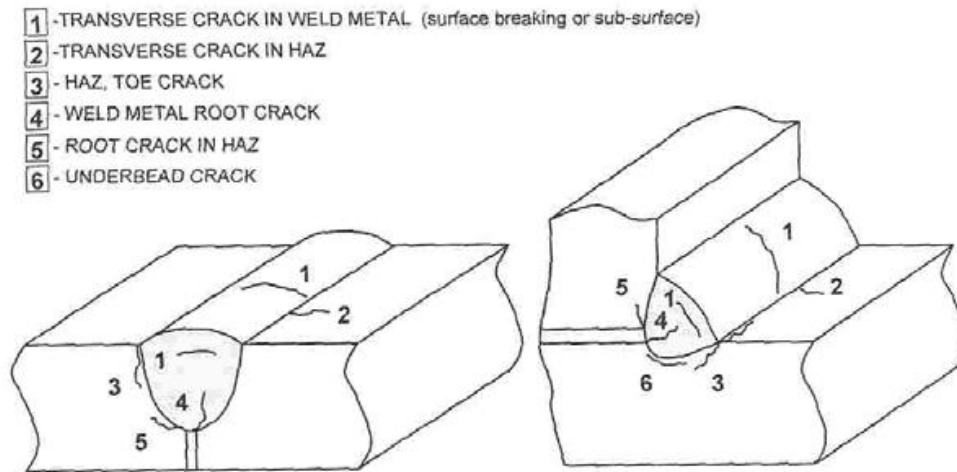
Hydrogen assisted cracks: a) butt weld, b) fillet weld [51].
